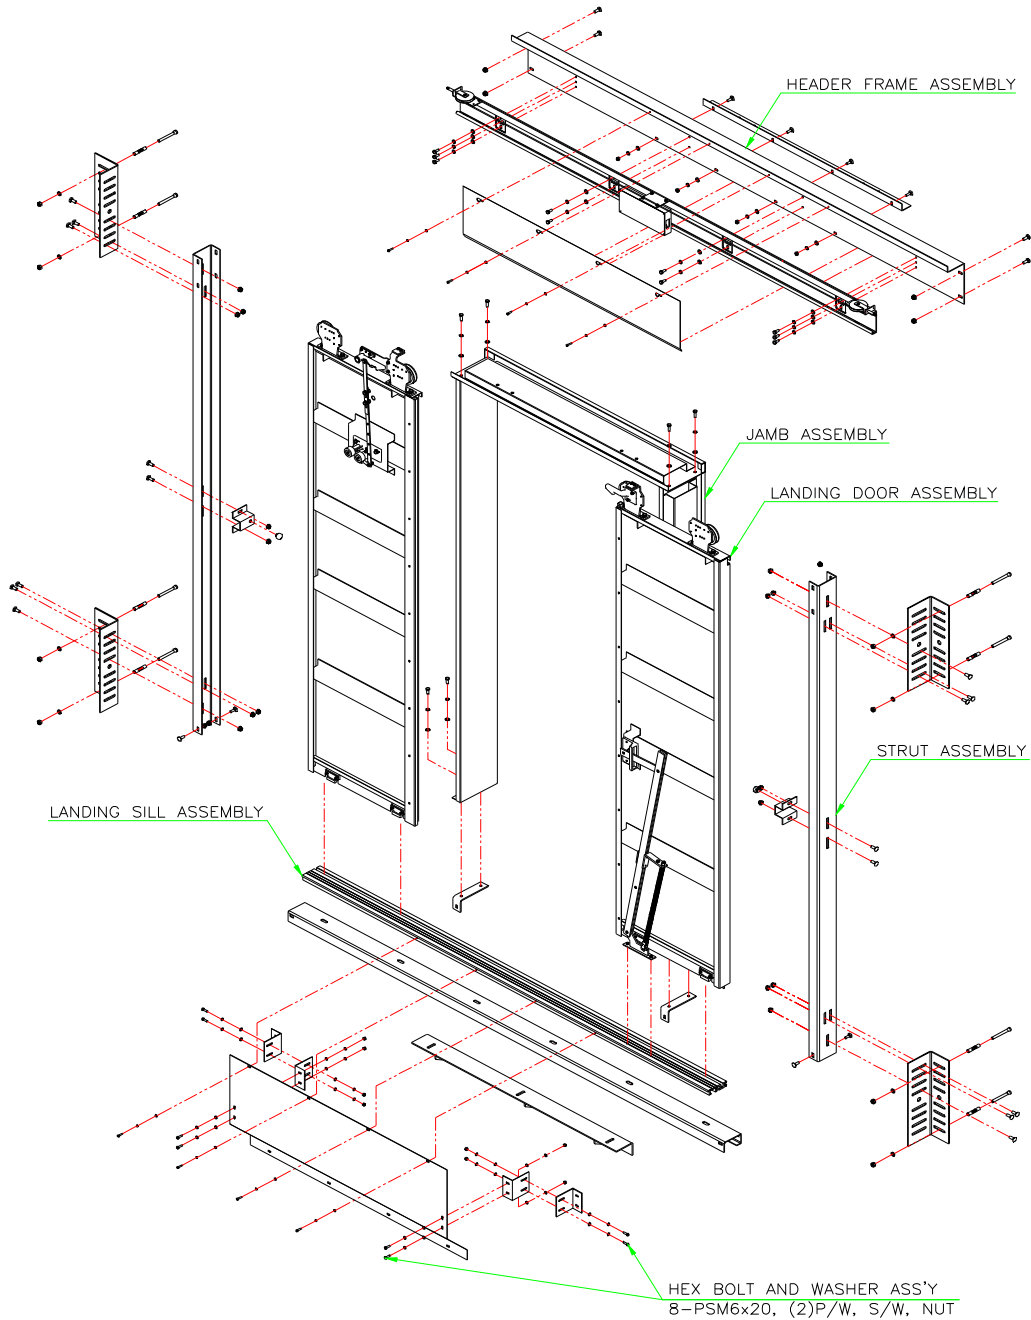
LANDING DOOR ASSEMBLY (SS)
